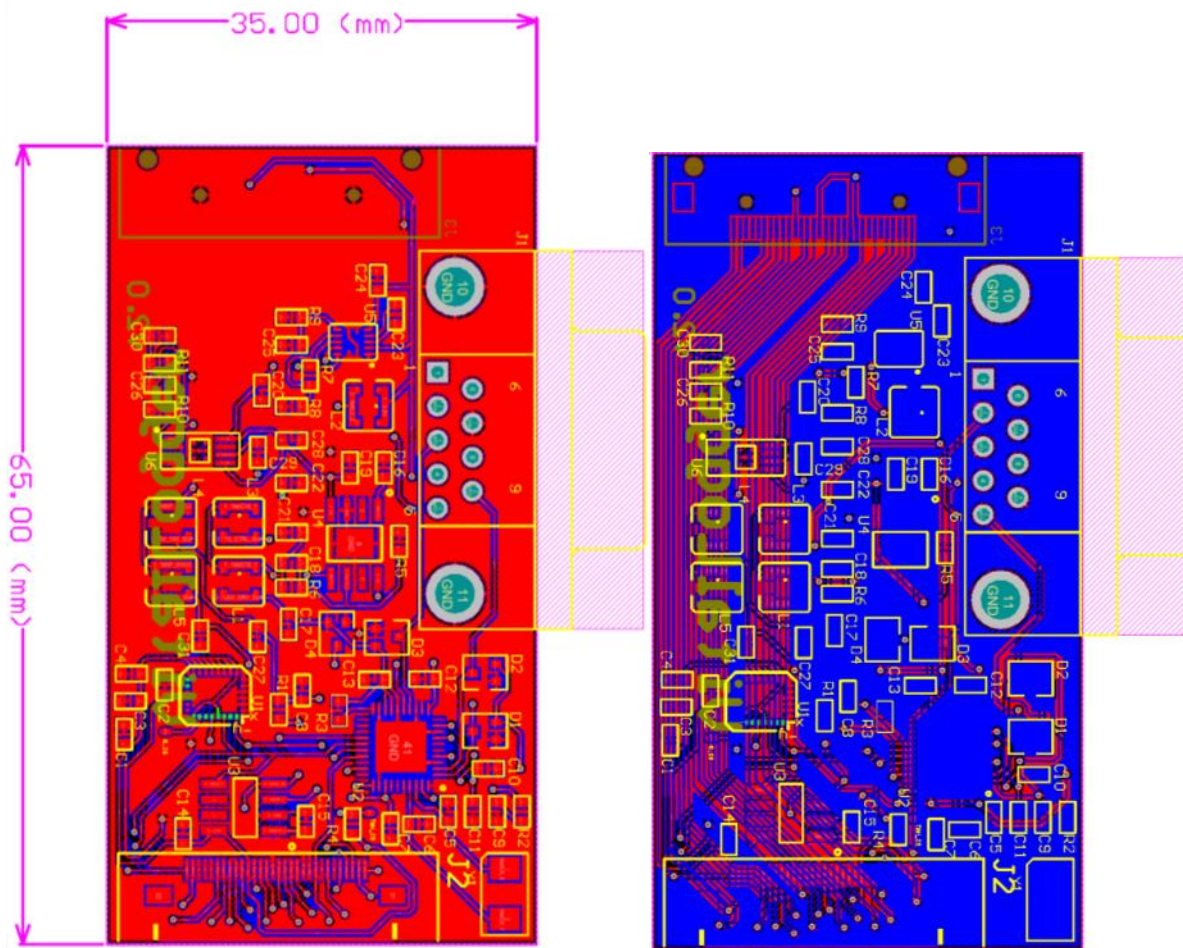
PCB design of VitalLogger extension board second prototype that was not produced. The left image shows the top layer and the right image the bottom layer.
